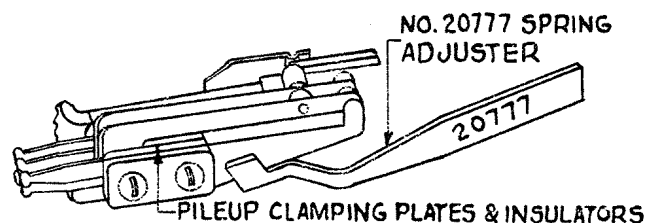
ADJUSTING SPRINGS TO MEET GAUGING
